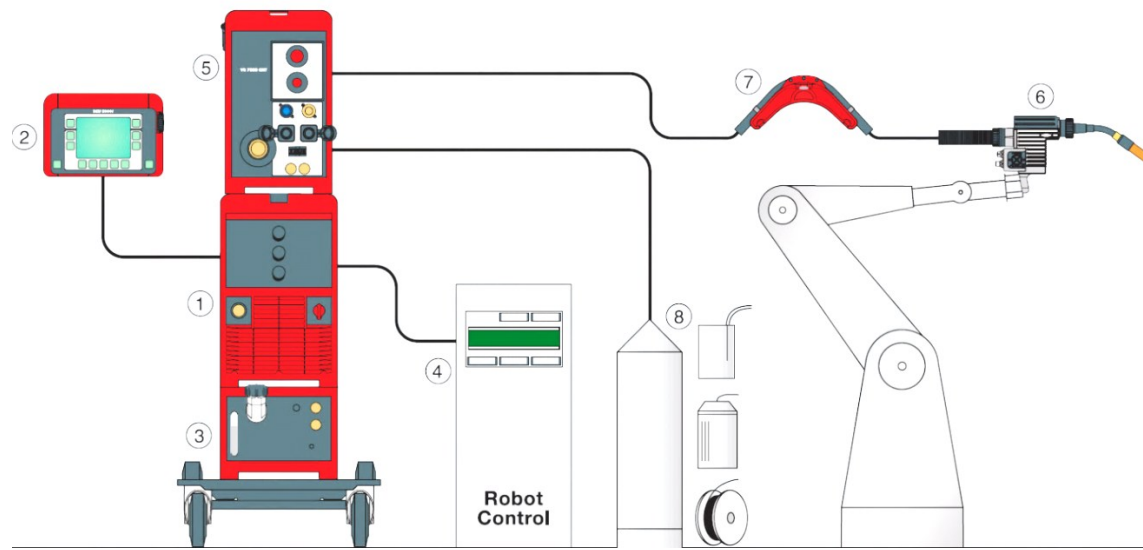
Welding System of CMT welding equipped for automated applications (Source: Fronius)
